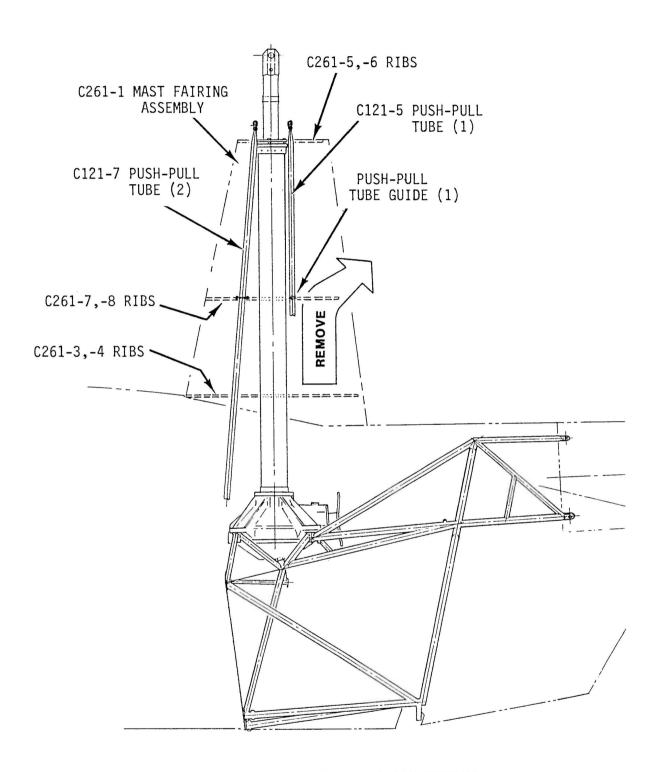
MAIN ROTOR GEARBOX REMOVAL
